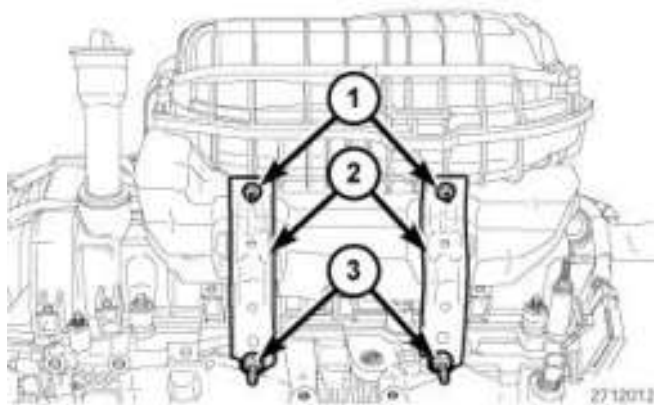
Nuts, Stud Retainers & Upper Intake Manifold Support Brackets
